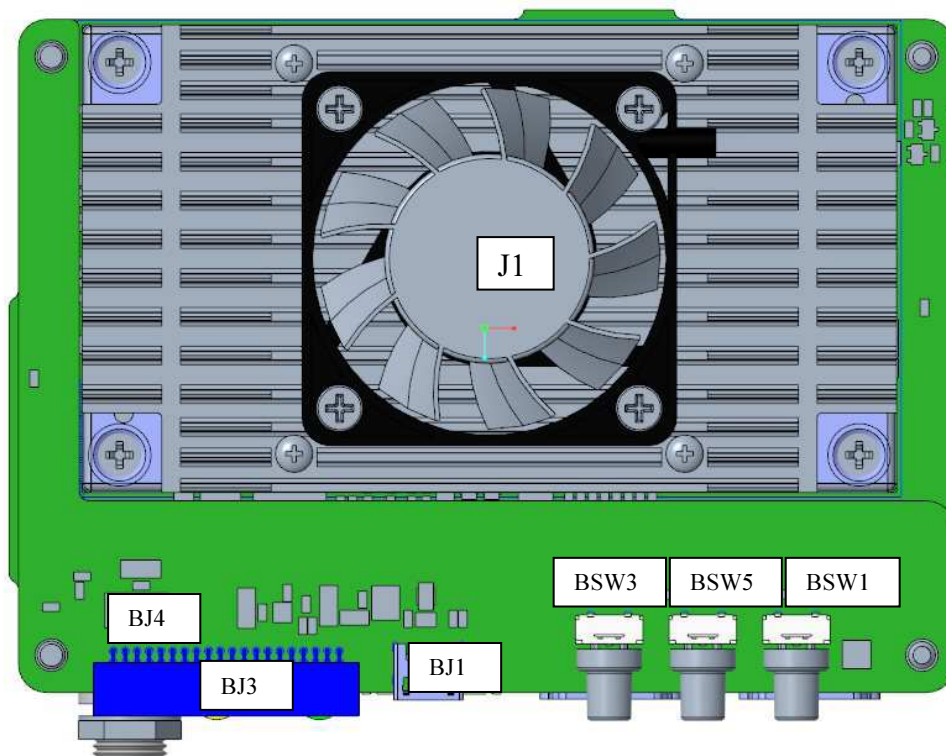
EX731AA Carrier Board + EX731B1 I/O Board Top View.
